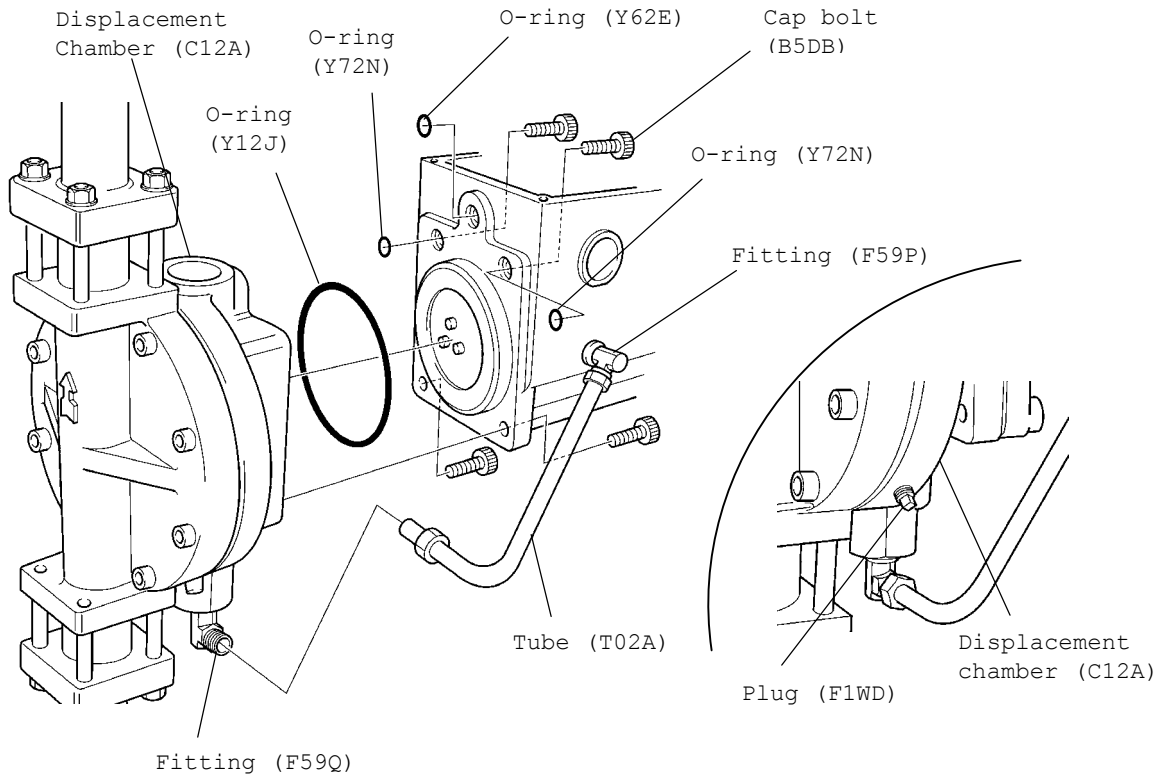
Removal of displacement chamber (DV-6-800)
